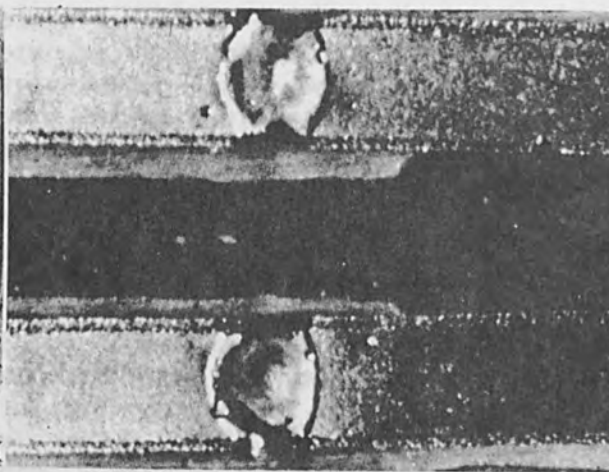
Close-up of welds shown in Fig. 8.
